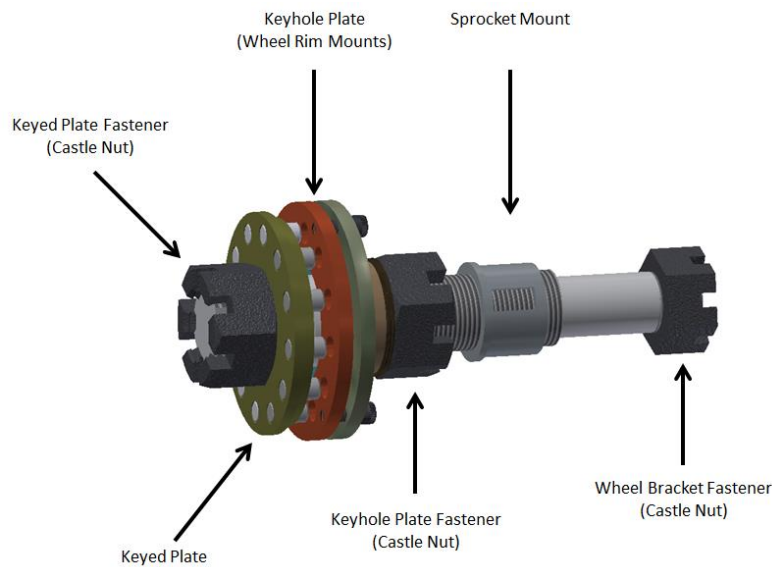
Wheel Axle With Decoupling Mechanism Highlighted.
